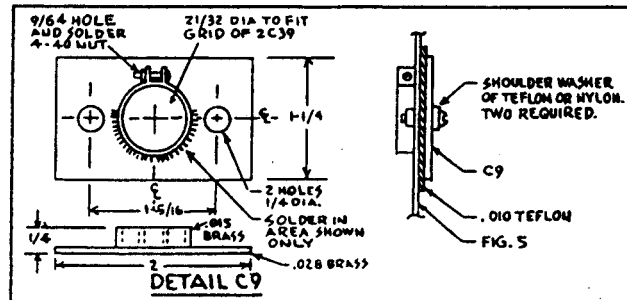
GRID BOX CONSTRUCTION DETAILS
